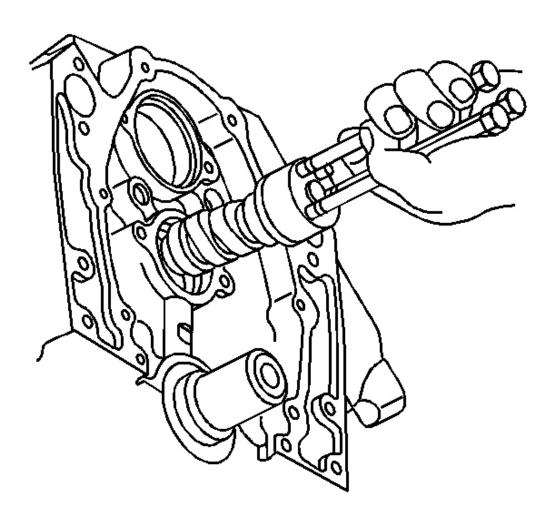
Using Bolts To Handle Camshaft Courtesy of GENERAL MOTORS CORP.
